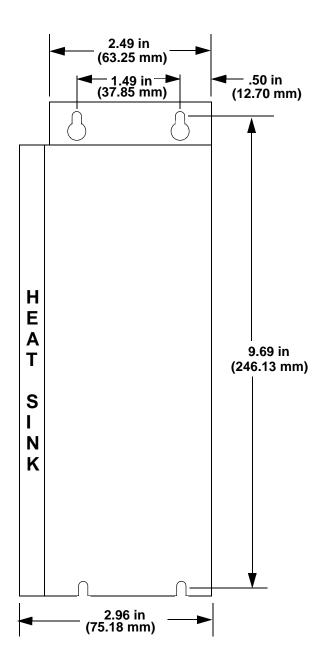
500 W Narrow Drive (-DN) - Front View
